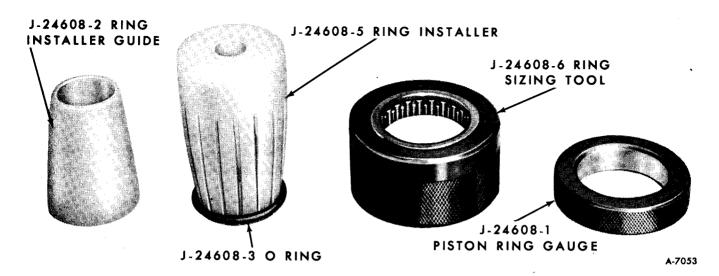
Teflon Piston Ring Installing, Sizing and Gauging Tools
